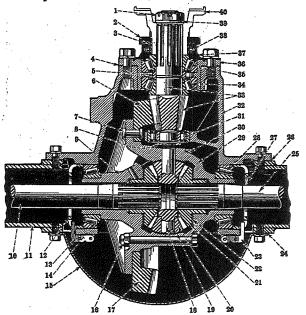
, R-1300, R-1400, RB-1400, RT-1400, RF-1401 Axle
